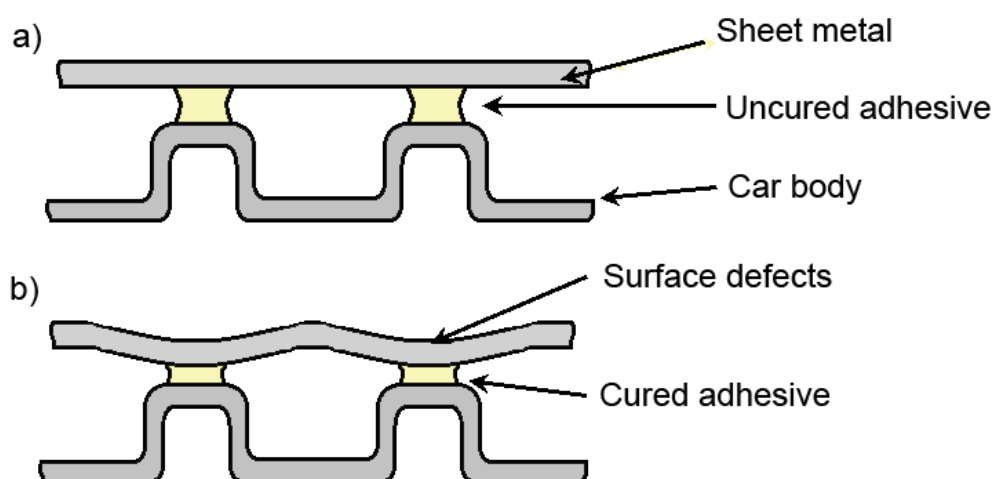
Schematic view of bondline defects in automotive structures. a) shows the uncured adhesive under the sheet metal. b) shows the same panel after curing, where the adhesive has shrunk and deformed the sheet metal.
